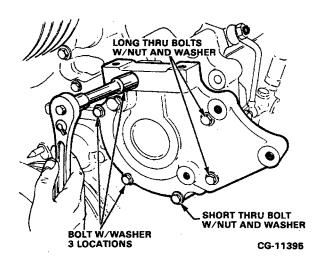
Remove Injection Pump Drive Gear Access Cover Bolts (1987 Model Year Shown)
